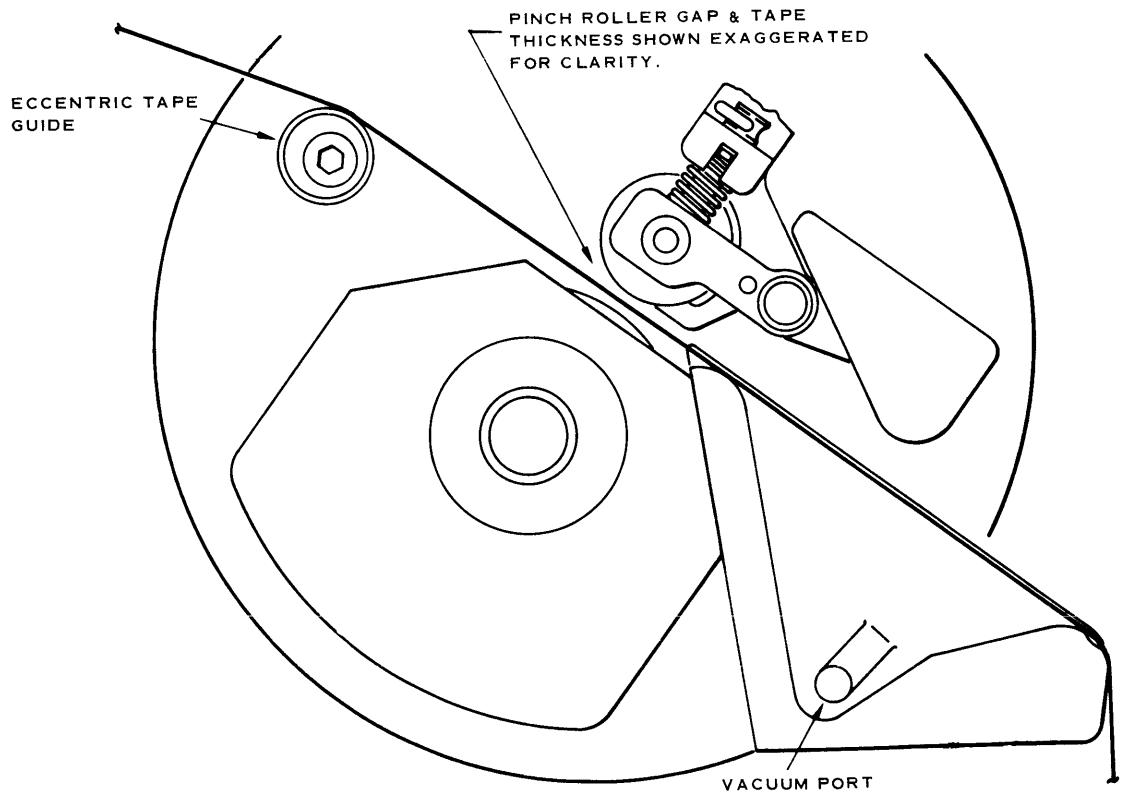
Expanded View of Right-Hand Tape Guide Drive Module
